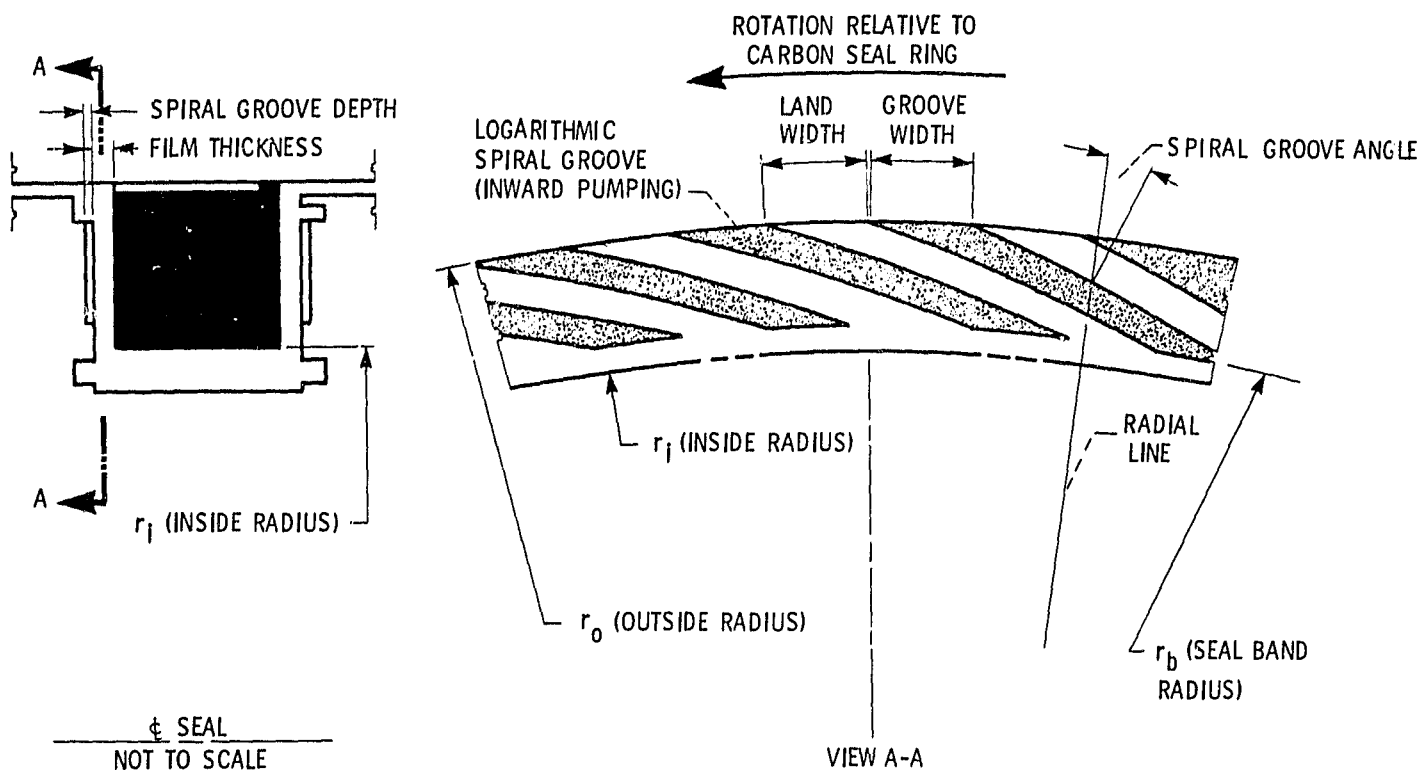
Spiral groove ring seal geometry and nomenclature.
